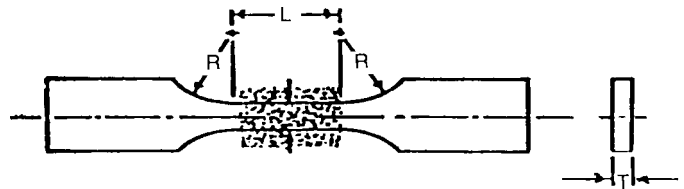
Specimens With Tangentially Blending Fillets Between the Uniform Test Section and the Ends for Axial Loading
